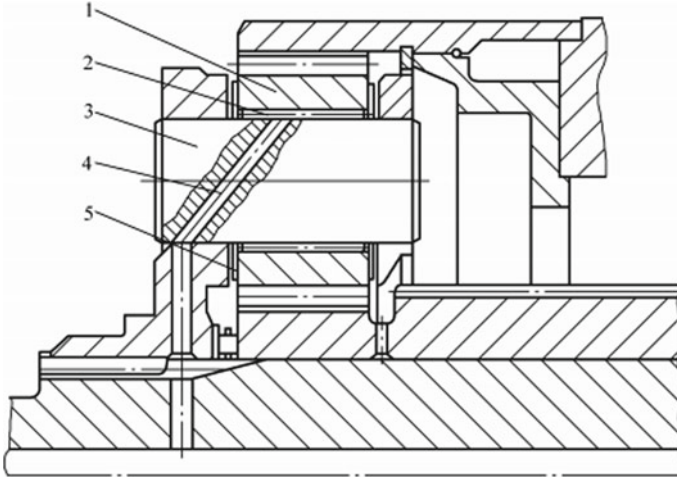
Installation diagram of crowded needle bearing. 1—milled planetary gear (carburizing and quenching), 2—needle roller, 3—carburized and quenched shaft, 4, 5—oil passage
